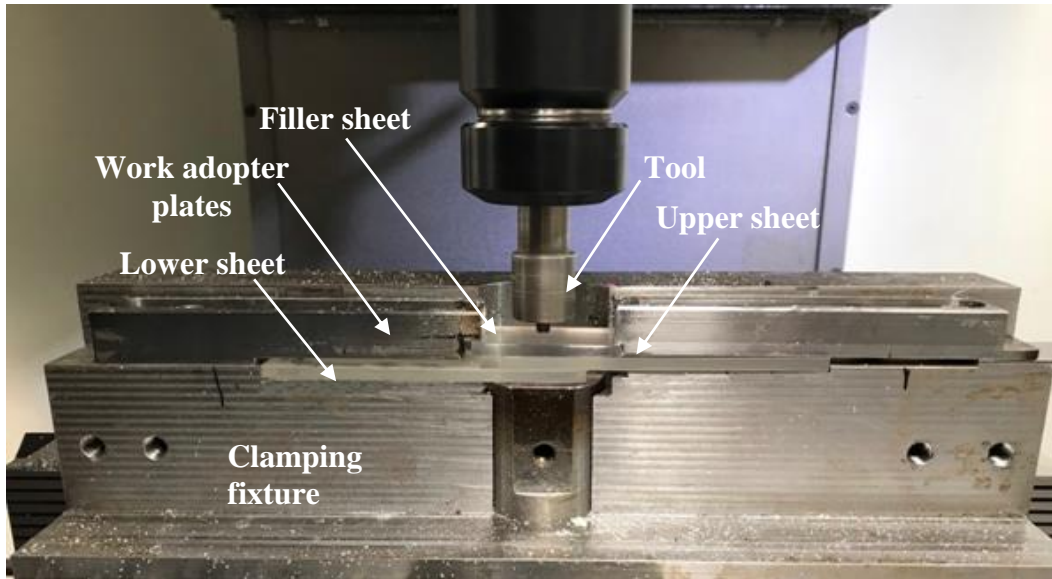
Welding positions of clamping apparatus, FSSW tool, and welding sheets for PC-PC joints.
